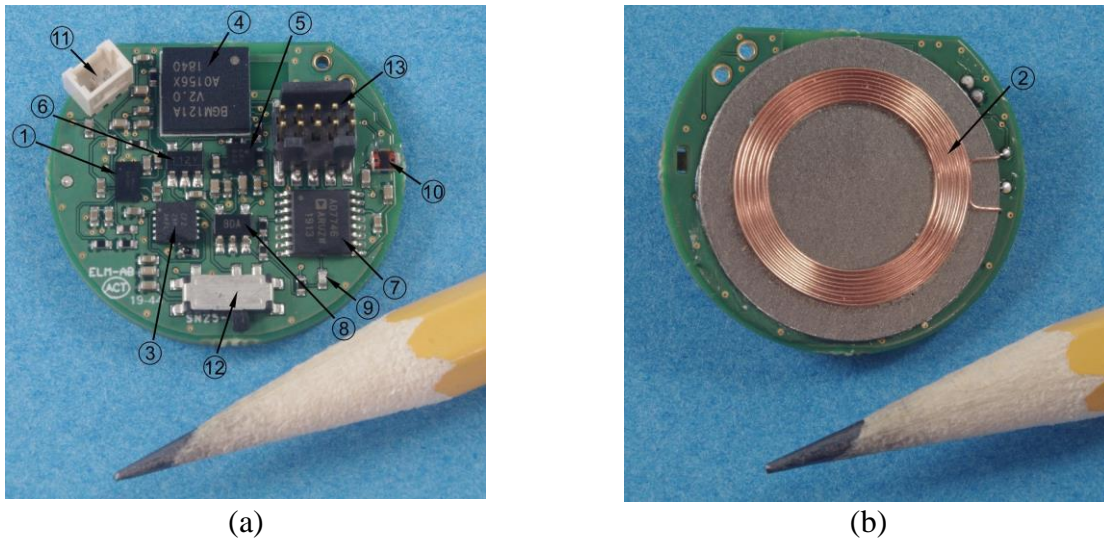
Photos of the manufactured ELM7 PCB: (a) top and (b) bottom view.
